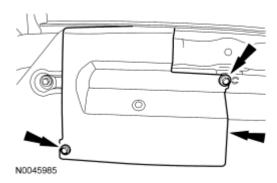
Locating Oil Filter Access Cover And Screws Courtesy of FORD MOTOR CO.
